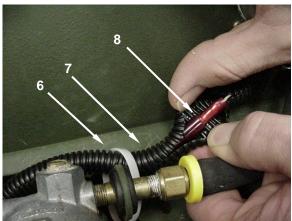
Replace Fuel Solenoid and Sediment Strainer Assembly.
